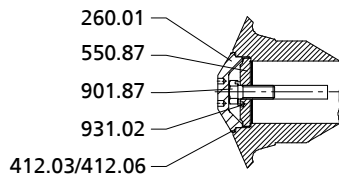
Impeller fastening for bearing brackets S07 and S08 (impeller types E and K), except Sewatec size 500-632
